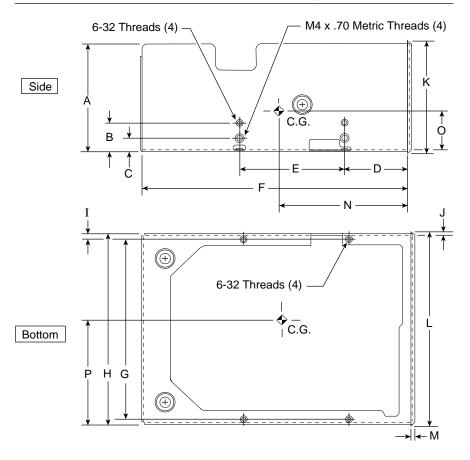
Mounting dimensions for ST43401N/ND and ST43402ND drives without a bezel
